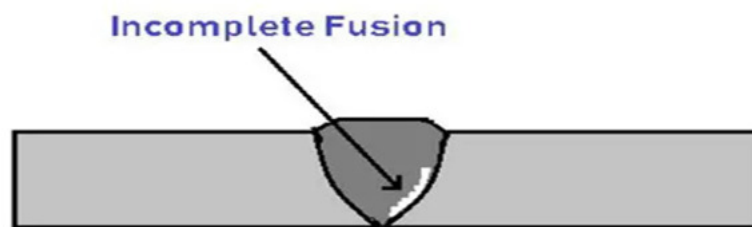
Representing the Incomplete fusion in weld [The Engineers Post].
